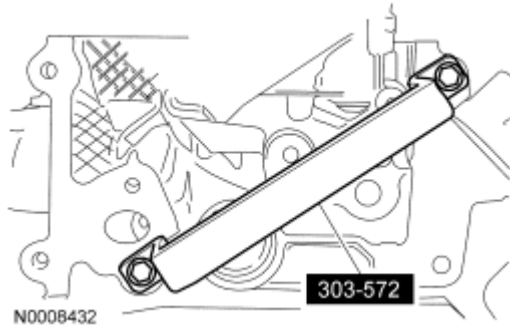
Identifying Special Tool (303-572) RH Cylinder Head
